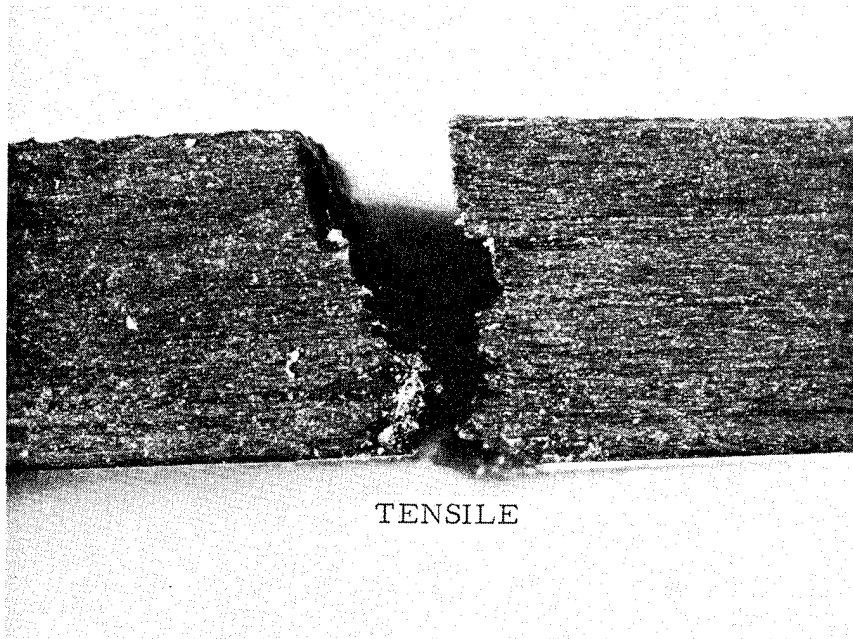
18X EDGE-VIEW OF IMPACT FRACTURE AREA OF PANEL #3 THORNEL 400
